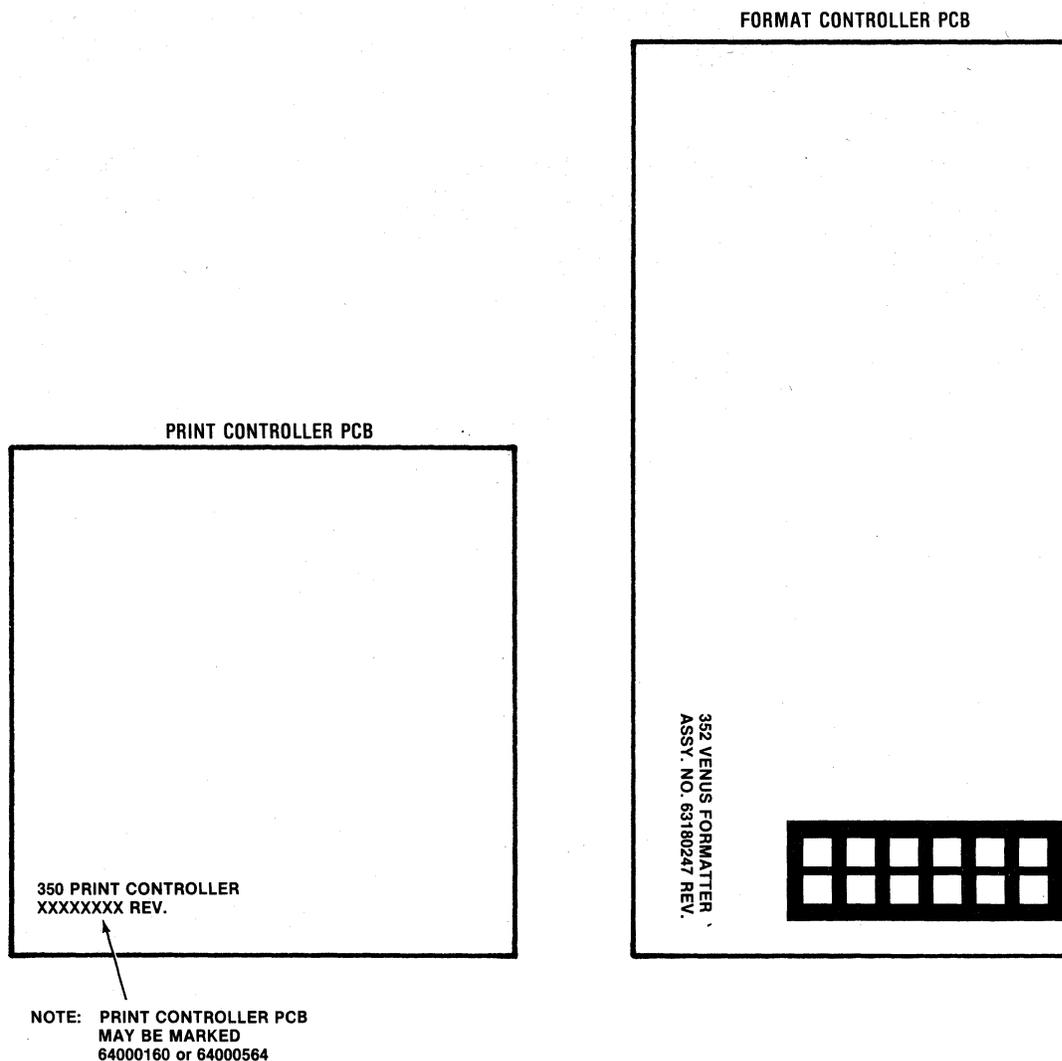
PRINTED CIRCUIT BOARD MARKING
